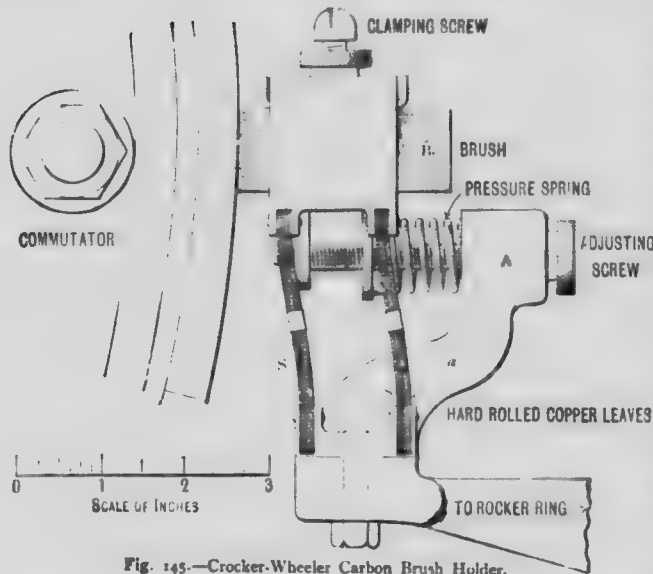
Crocker-Wheeler Carbon Brush Holder.
